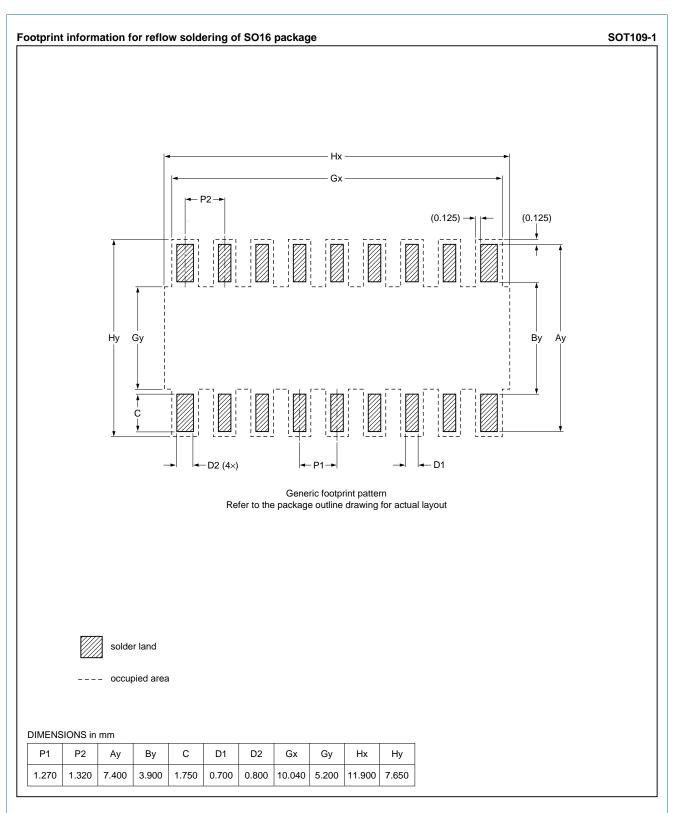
PCB footprint for SOT109-1 (SO16); reflow soldering
